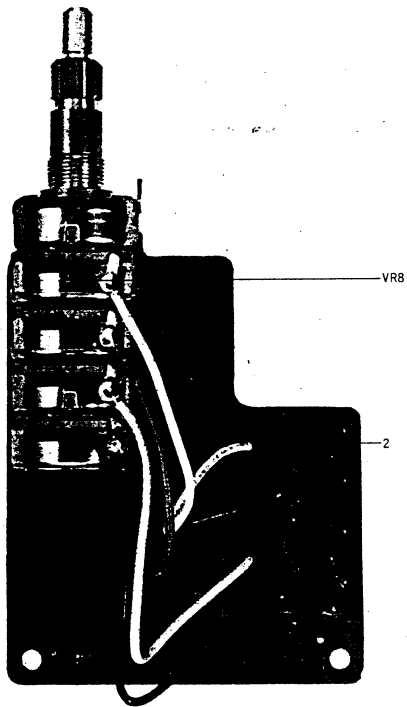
PHOTO OF TONE CONTROL P.C. BOARD (98-5007)
